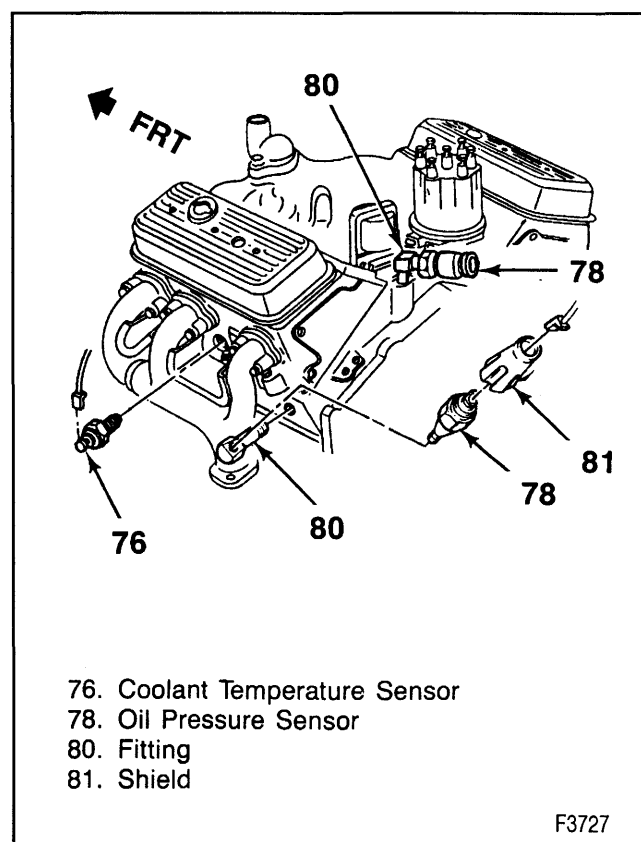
Coolant Temperature and Oil Pressure Sensors (4.3L VIN Z)
